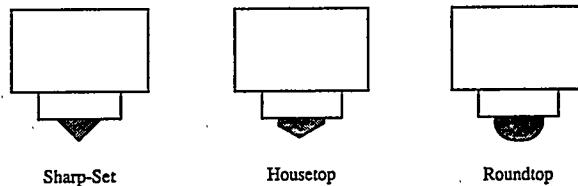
Profiles of TSP cutters used in single-cutter wear tests. (TSP disk cutter not shown.)
